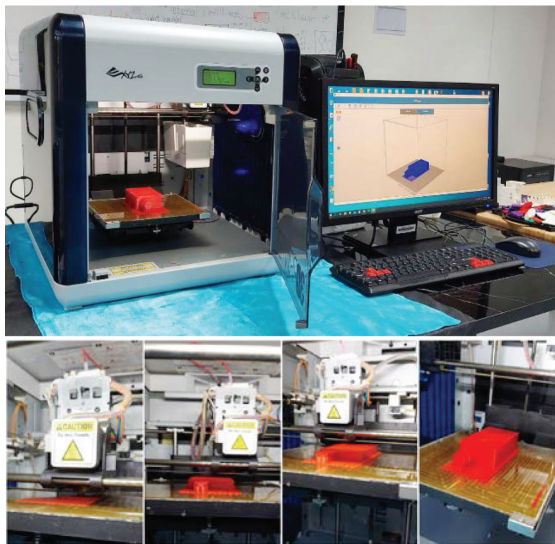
3D printing machine with different views during fabricating sample models of the perfume bottles
